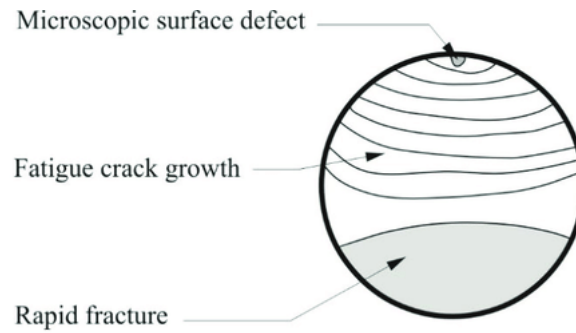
The fracture surface of a typical fatigue fracture [16]
